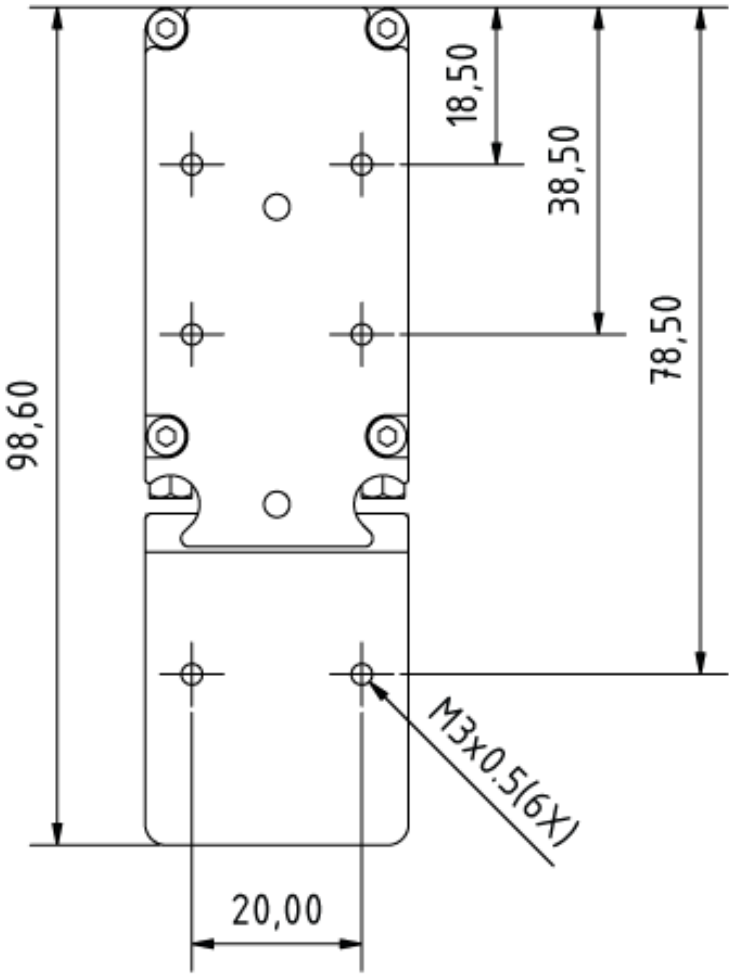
PowerBox with Lambda beam attached technical drawing
